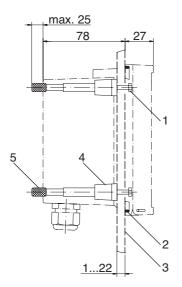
protective hood for wall and pipe mounting (All dimensions in mm!)
